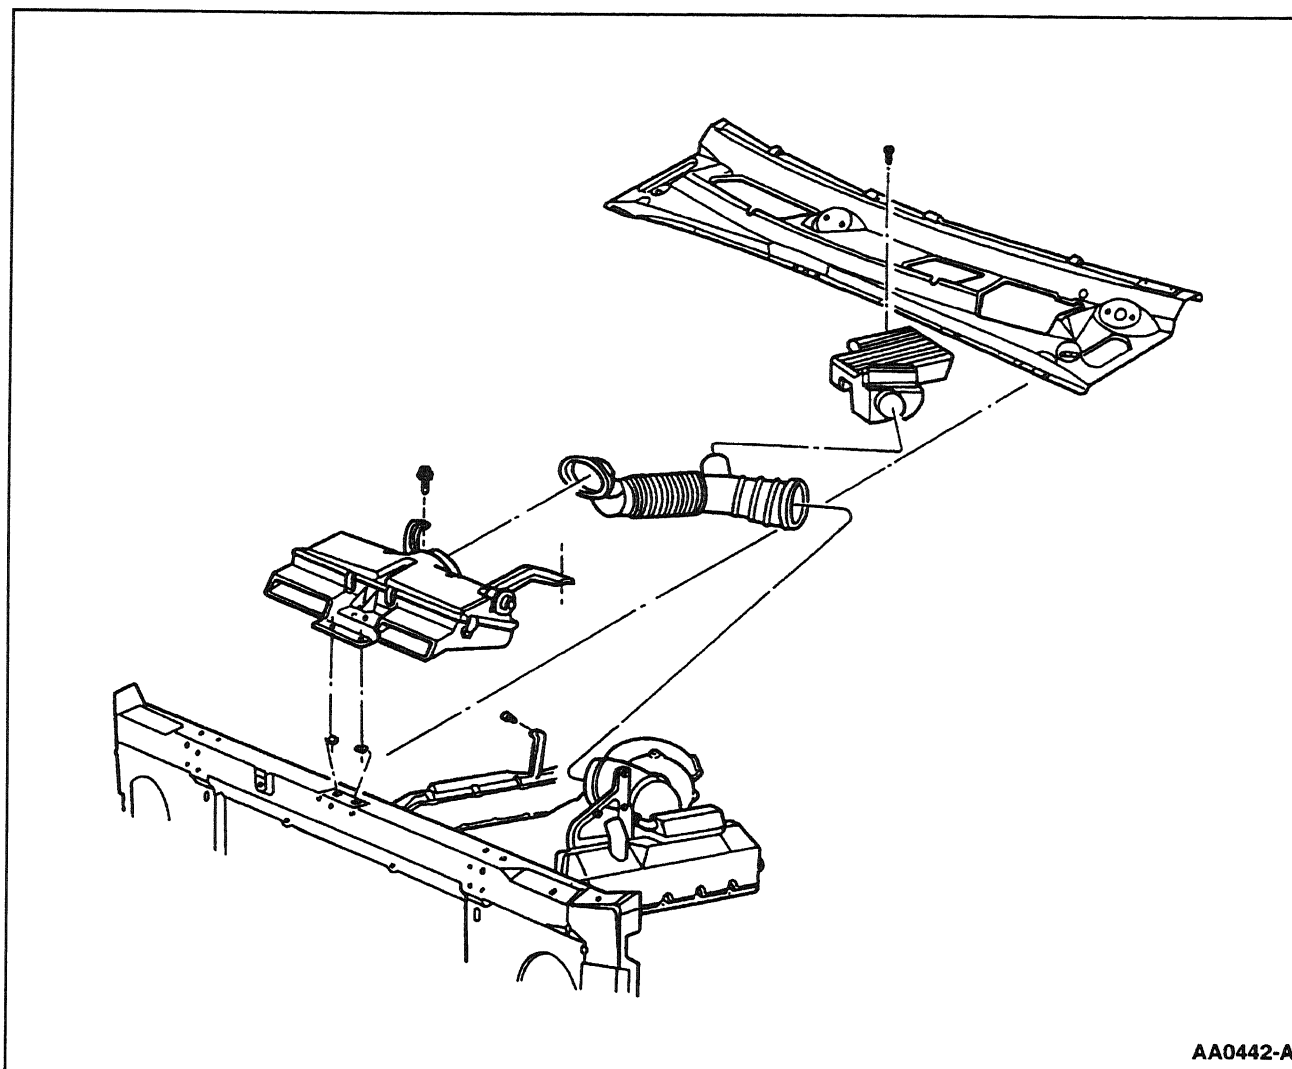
Engine Air Cleaner, 7.3L Diesel Engine—Econoline
